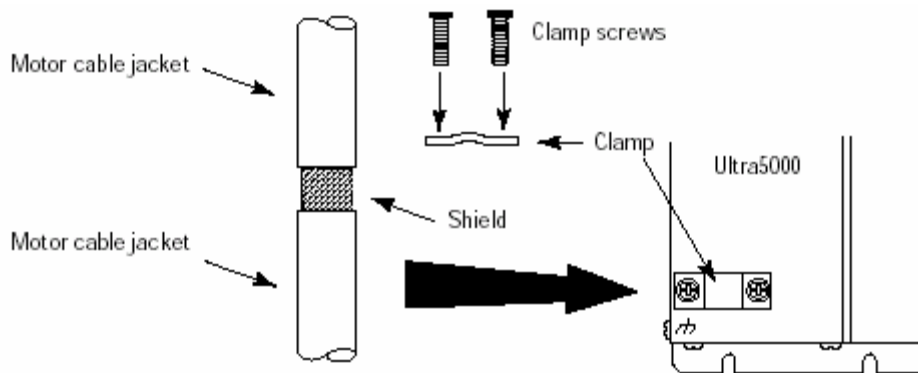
Motor Power Filter Shield Connection to Servo Drive
